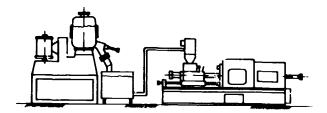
Dryblend processing line (schematic drawing): one-step moulding on horizontal injection moulding machines
